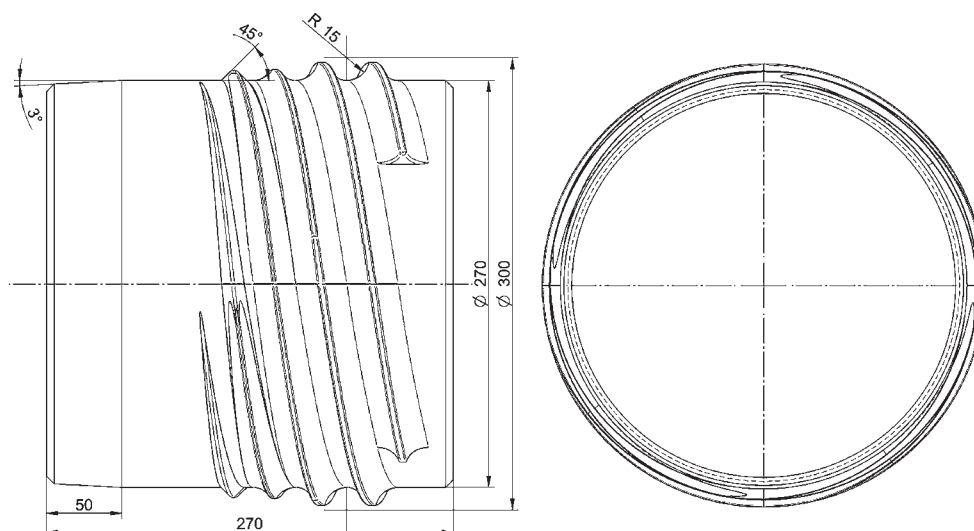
Multi-wedge rolls used in helical rolling for producing 30 mm diameter balls
